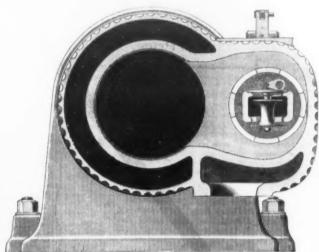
,-Cross-Section of Cylinder and Valve-Chest.
